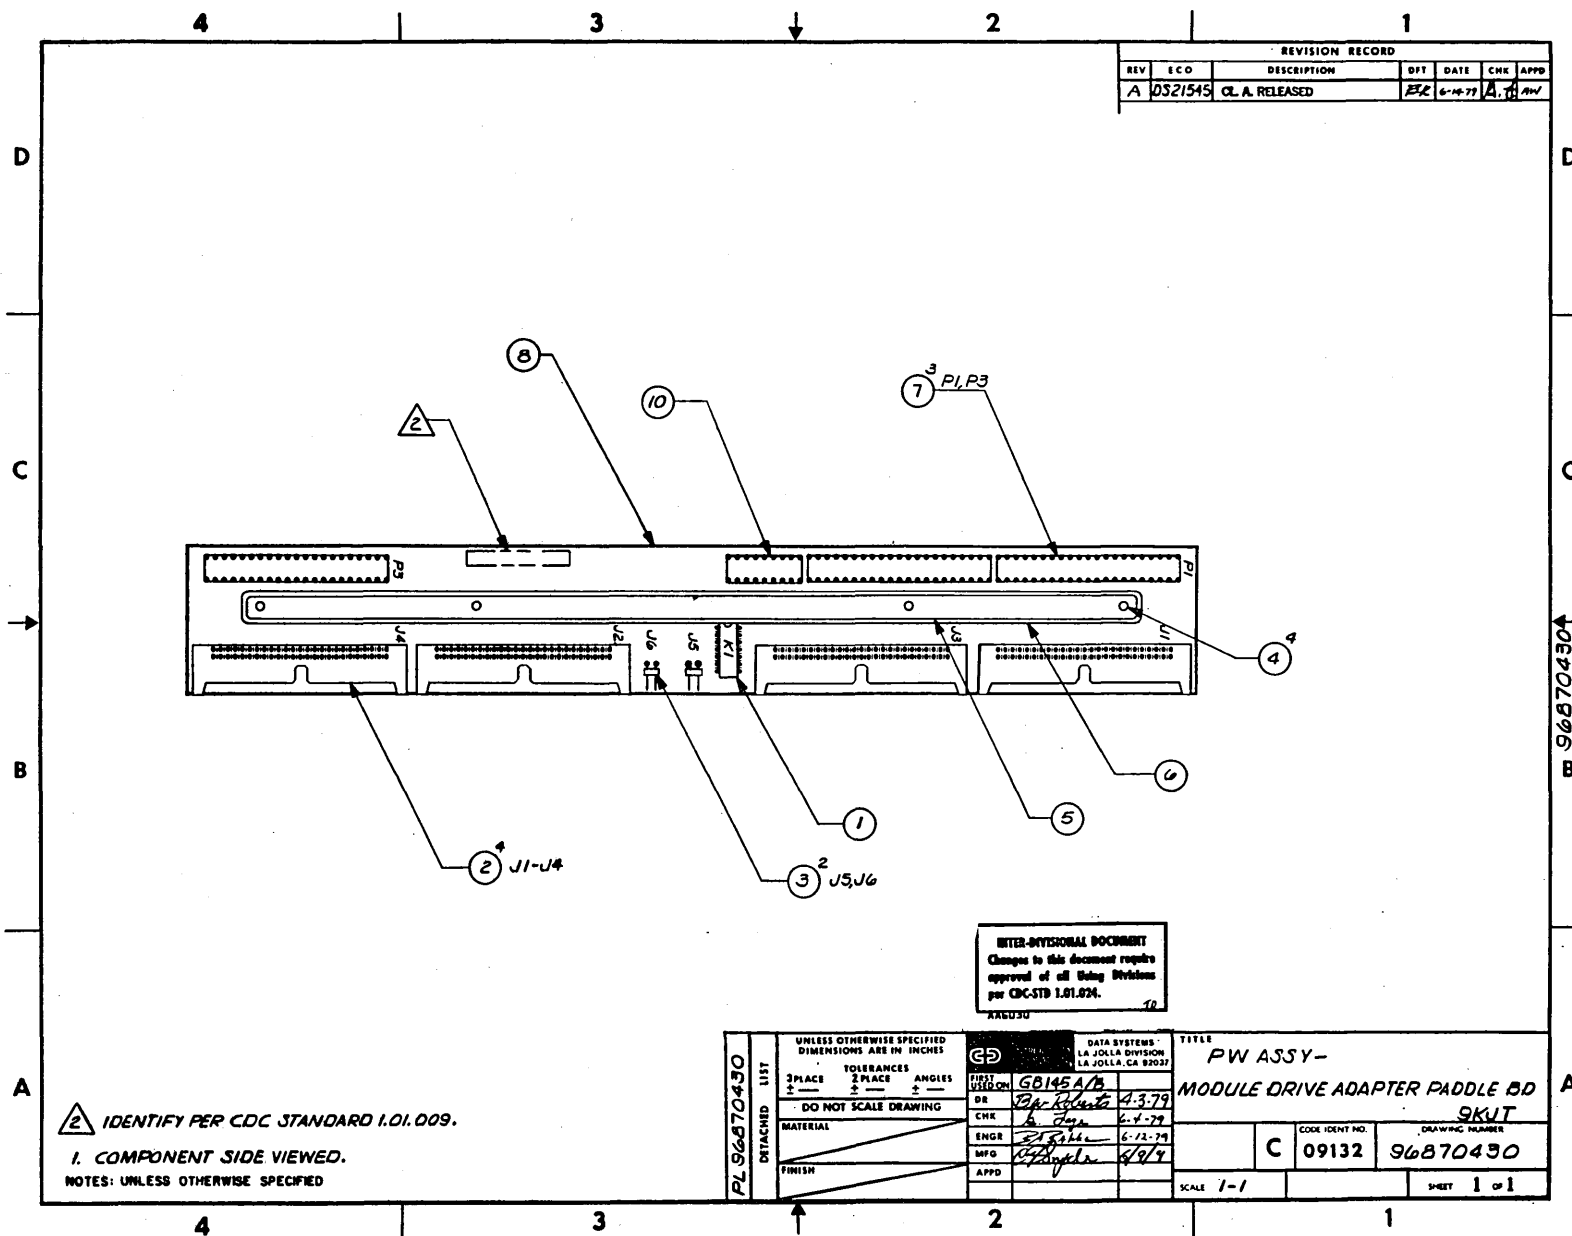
PWA - Module Drive Adapter Paddle Board (Sheet 1 of 2)
